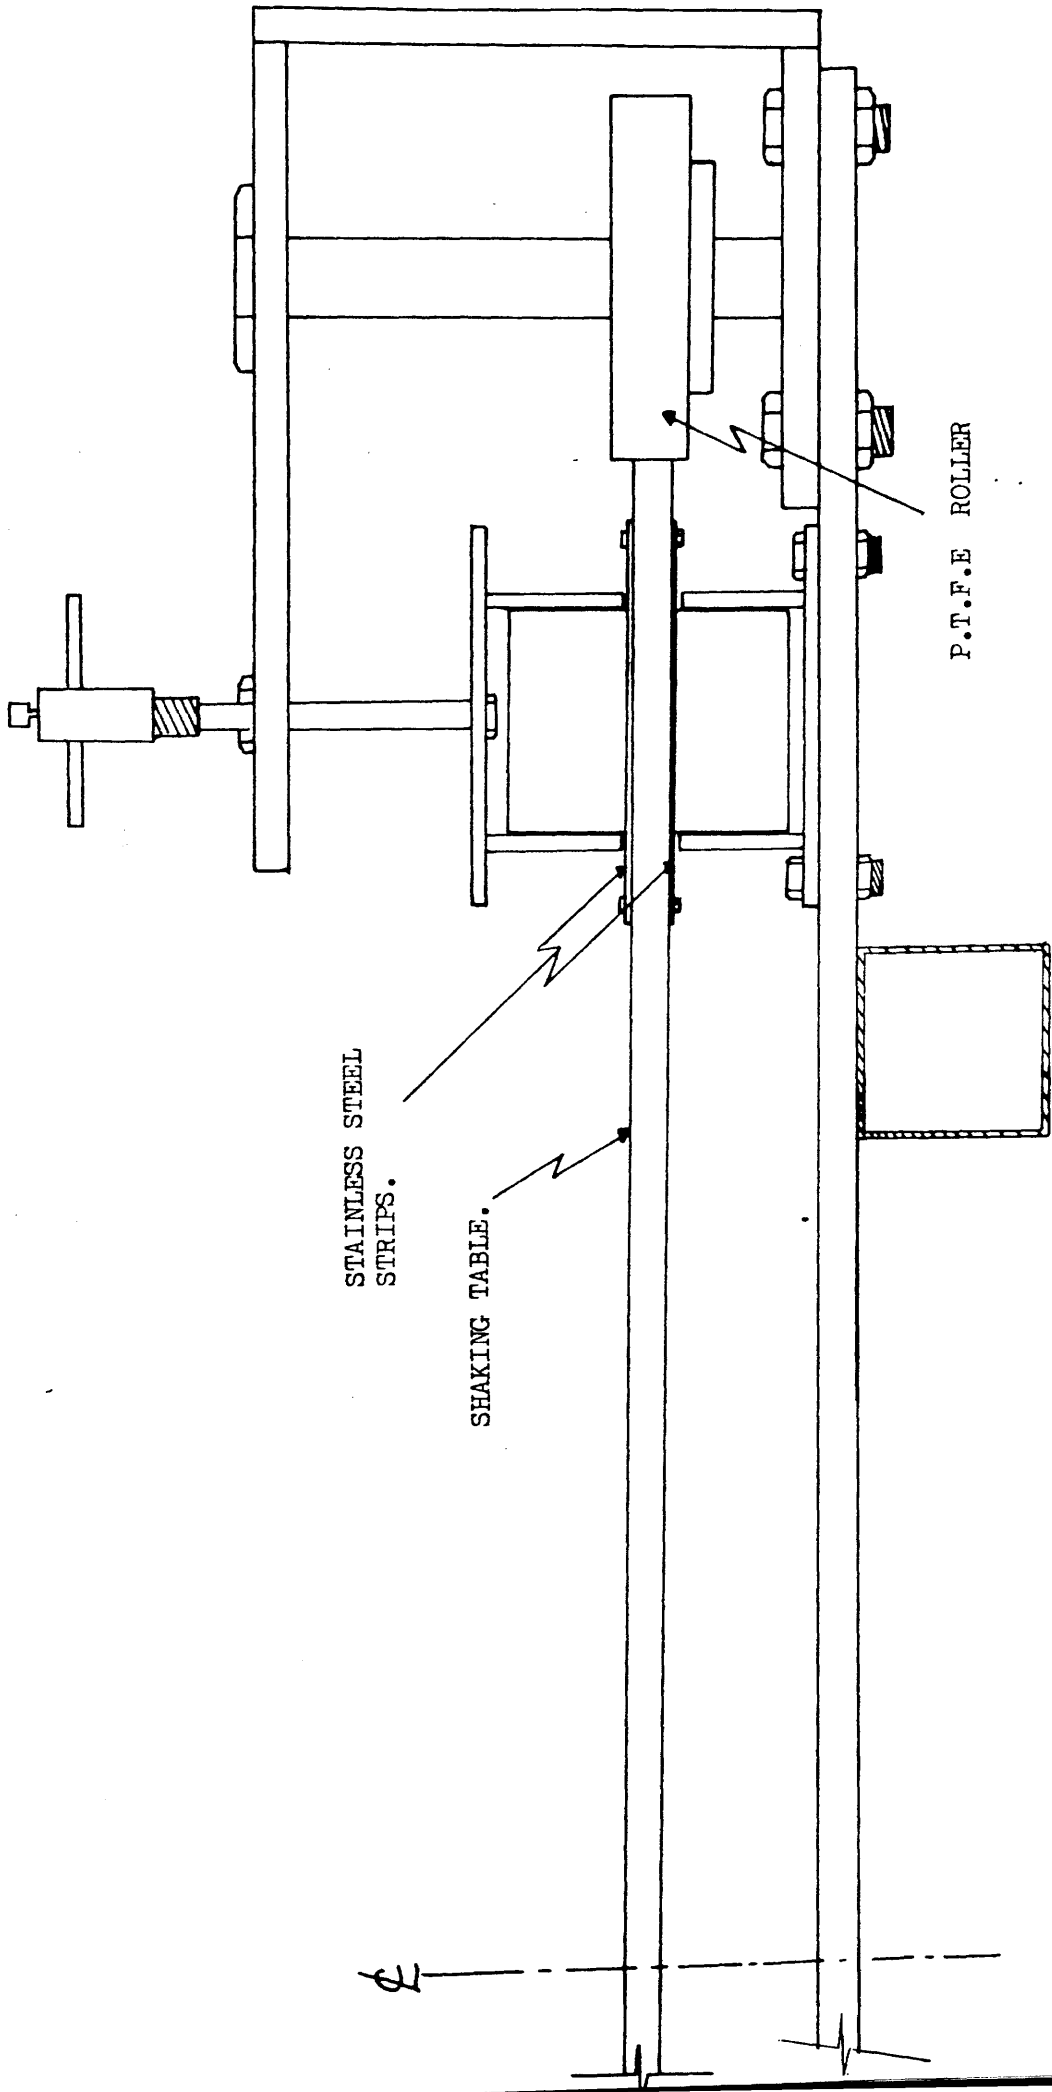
FRONT ELEVATION OF A SINGLE TABLE SUPPORT MECHANISM.
